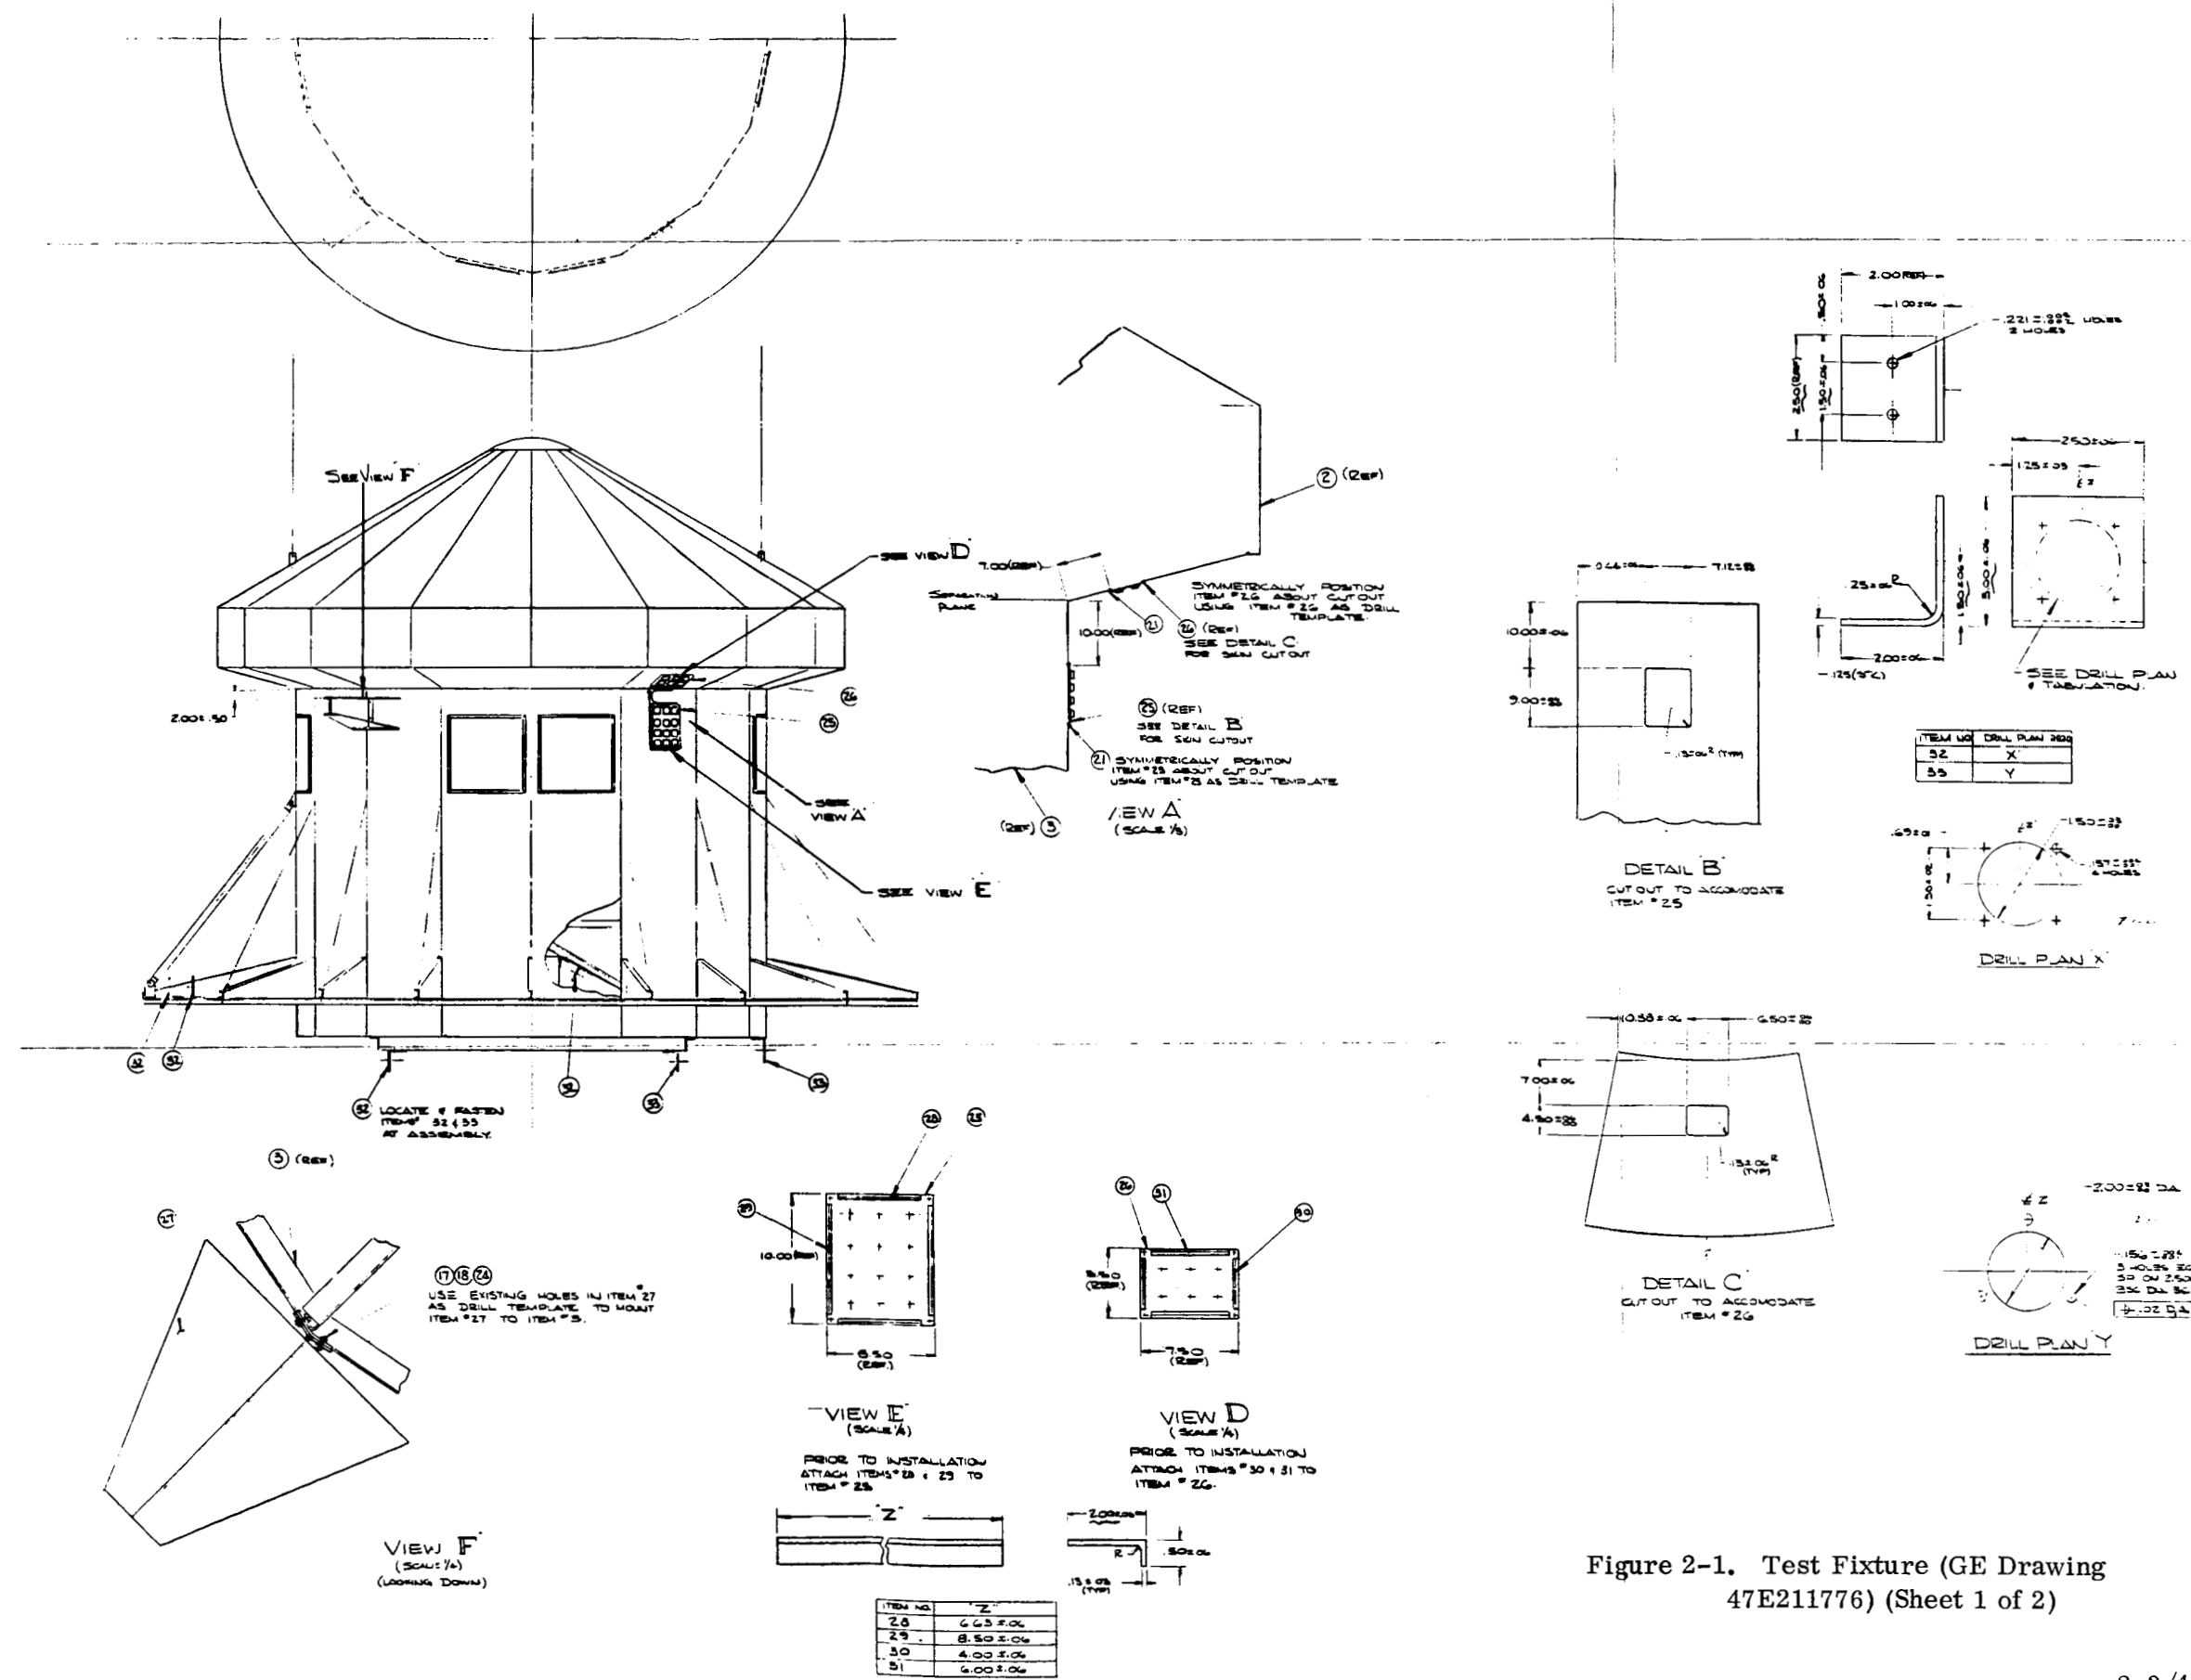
Test Fixture (GE Drawing 47E211776) (Sheet 1 of 2)
